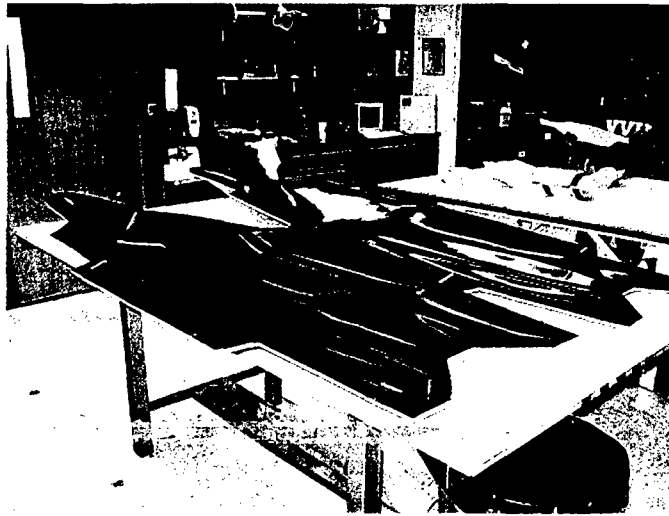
Top and Bottom Mold Sections Used to Produce Aircraft Shells
